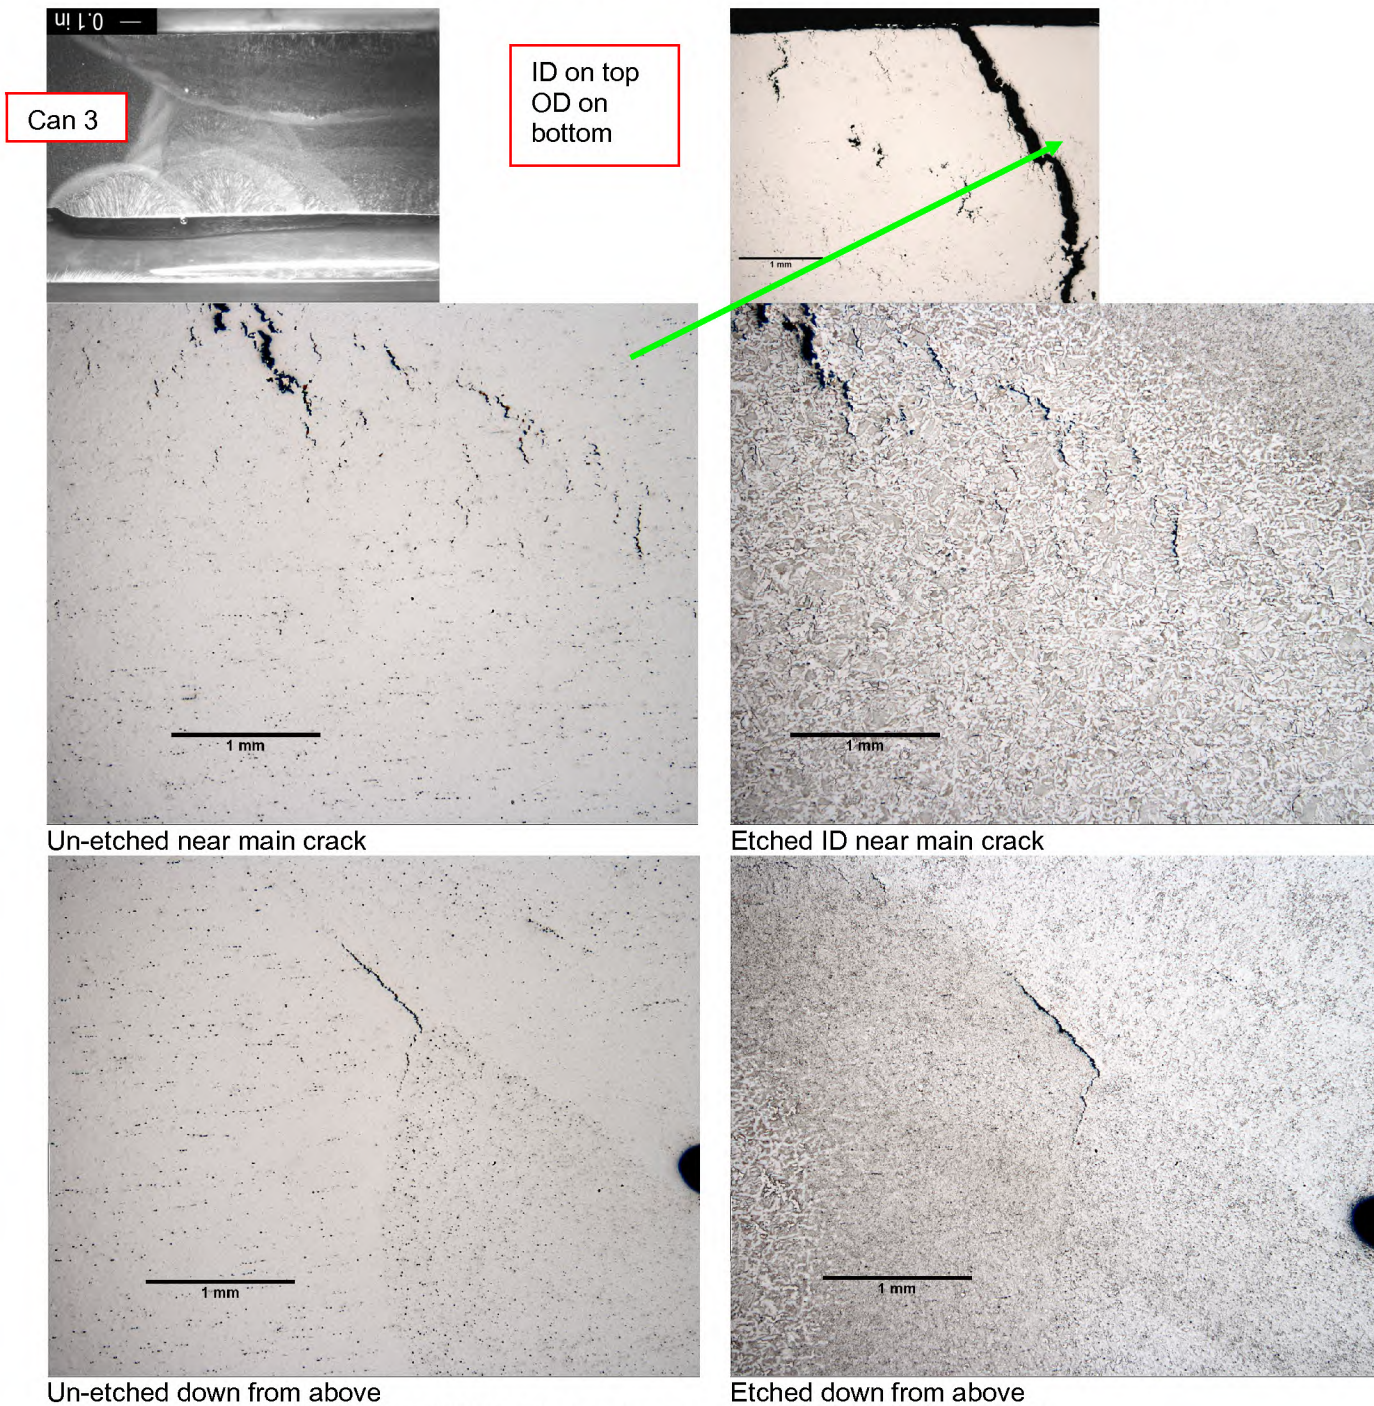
Photomicrographs of Mount T2 near weld
